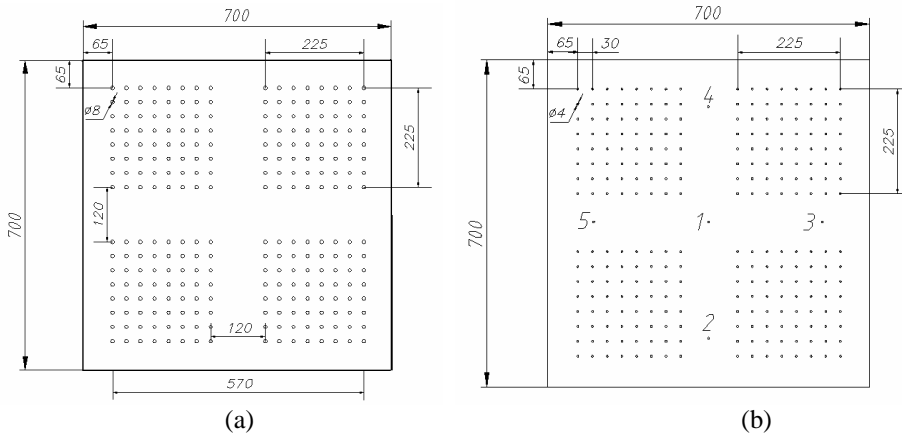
The scheme illustrates the perforation of acoustic boards: (a) – particle boards, b – lightweight boards
